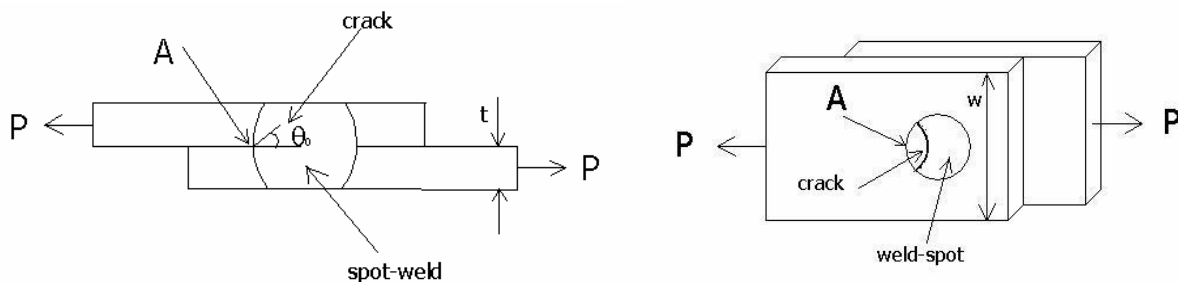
Crack initiation and propagation in spot welded tensile shear specimen.
